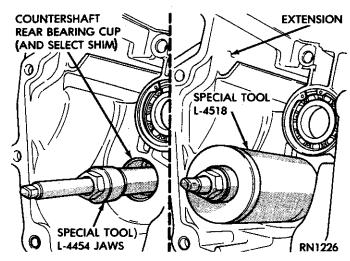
Removing Countershaft Gear Rear Bearing Cup
